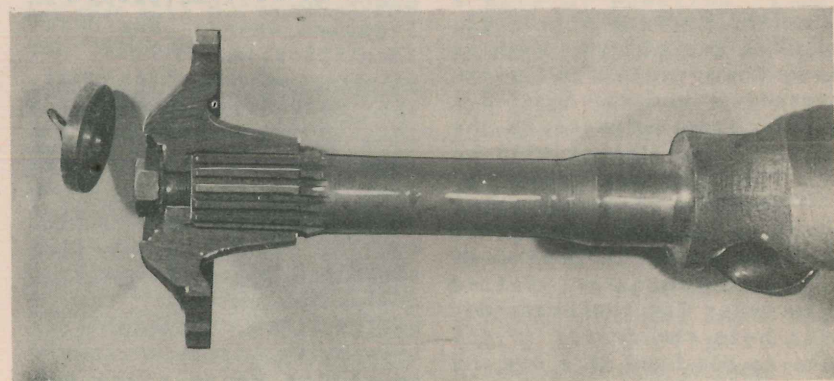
A cutaway of the axle shaft after the repair. The little, round thing off the end, is the stepcut washer.
